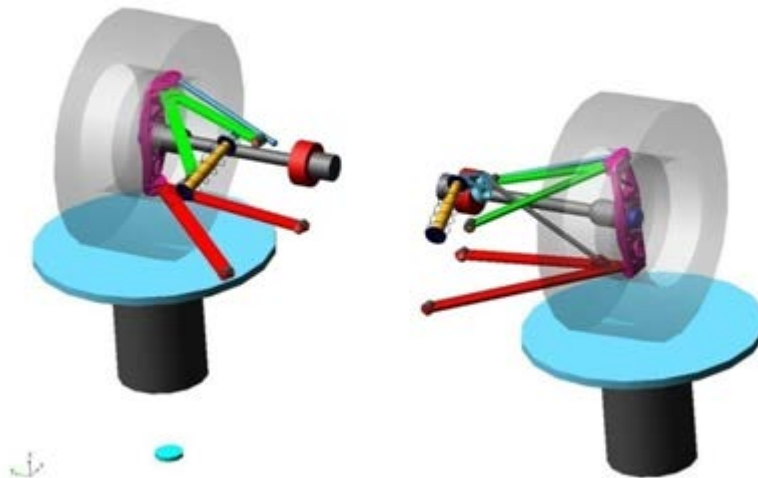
MBD Model of TU FSAE Rear Suspension Assembly
